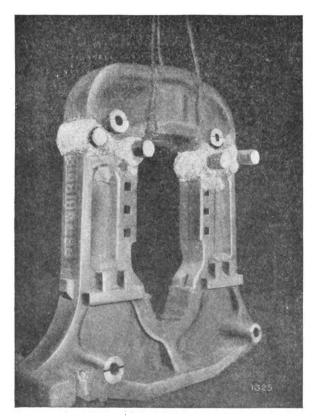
Rolling Mill Housing Welded by Thermit Process
